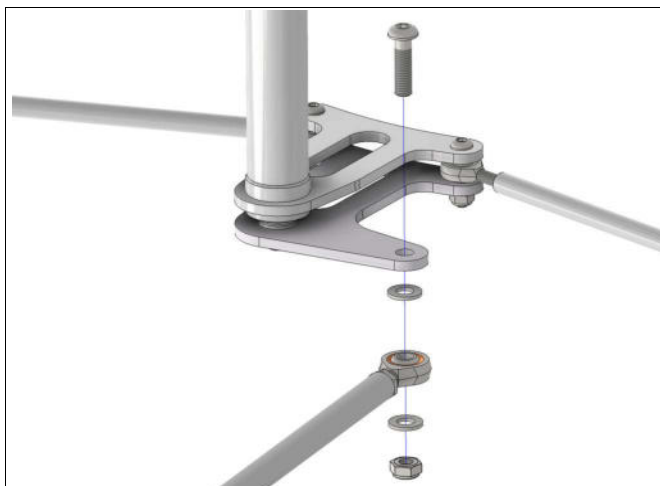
Gekko fx 26: part order when mounting the steering rod to the stem adapter
